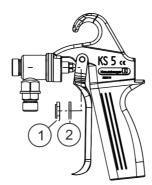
Slide the insulating washer over the seal screw; screw head piece onto the seal screw using a hexagon nut
